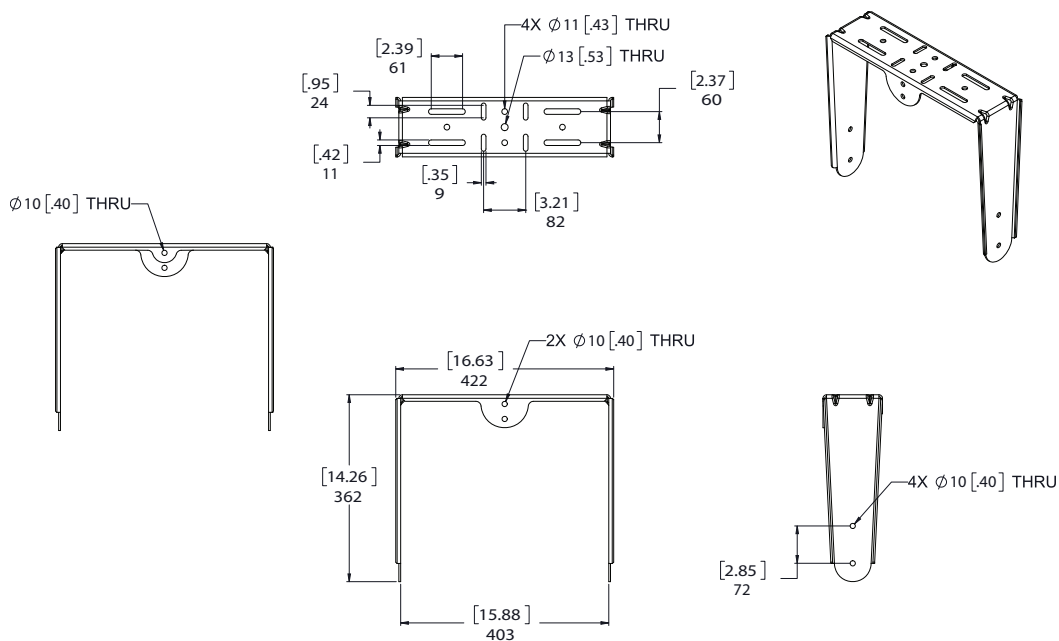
YK-1090 Yoke [Inches] Millimeters
